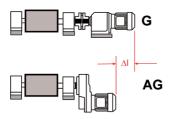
Principle of the single drive with slip-on roller-table geared motor (AG) by comparison with drive through a coupling (G) Difference in space requirement: ΔI
